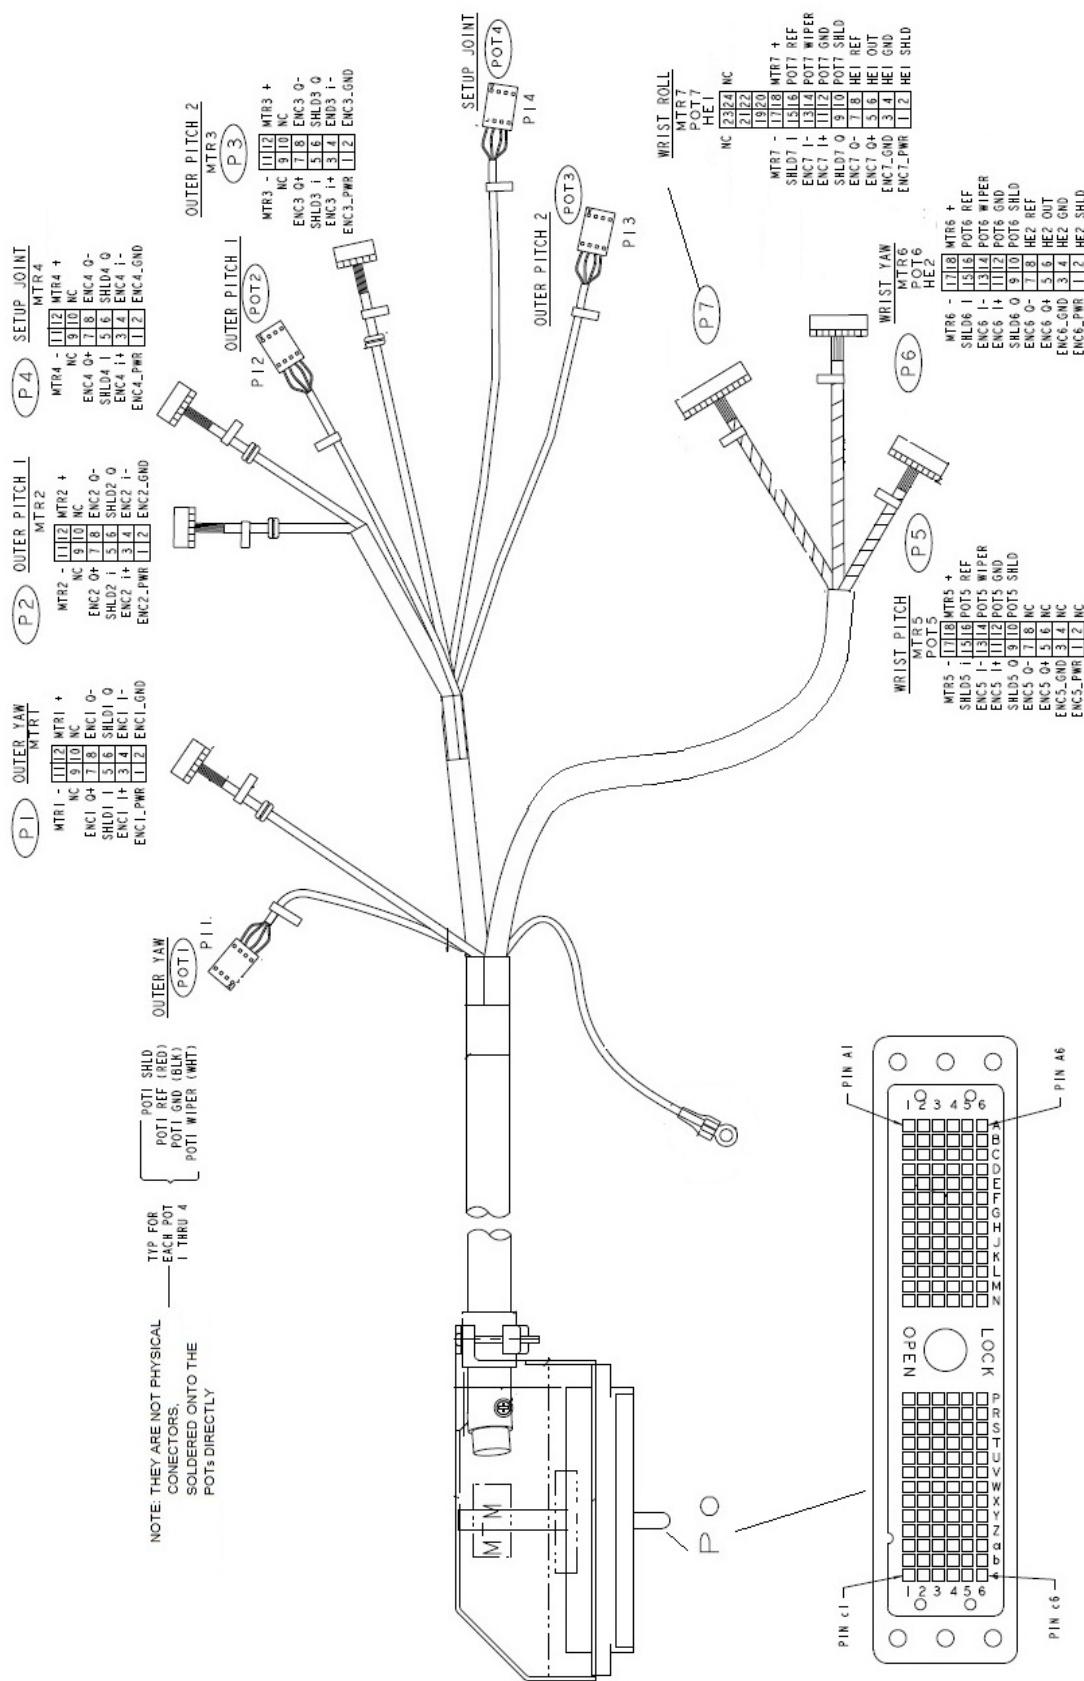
MTM INTERFACE CONNECTOR WIRING LAYOUT.
